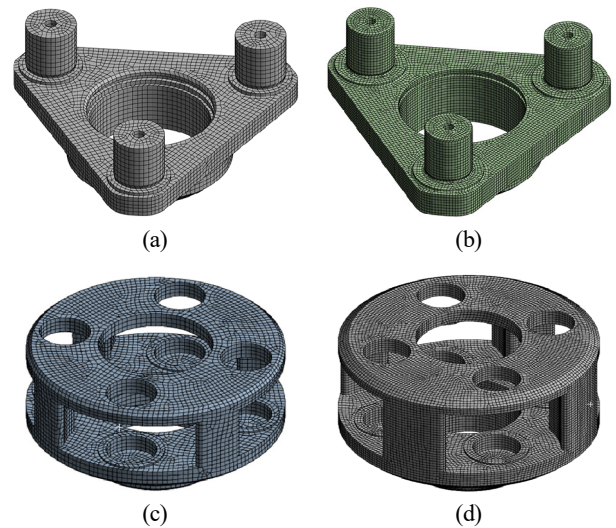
Carrier finite element models: (a) 1st carrier, (b) 2nd carrier, (c) 3rd carrier, and (d) 4th carrier
